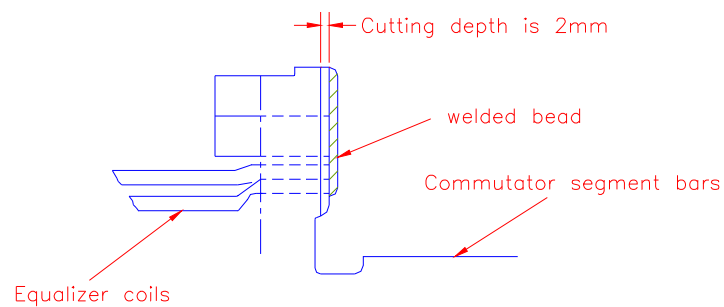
MACHINING OF COMMUTATOR RISER END FACE
